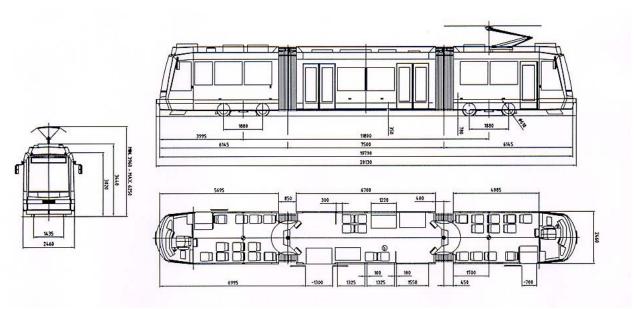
Portland Streetcar general arrangement. (Source: Inekon/Skoda.)
